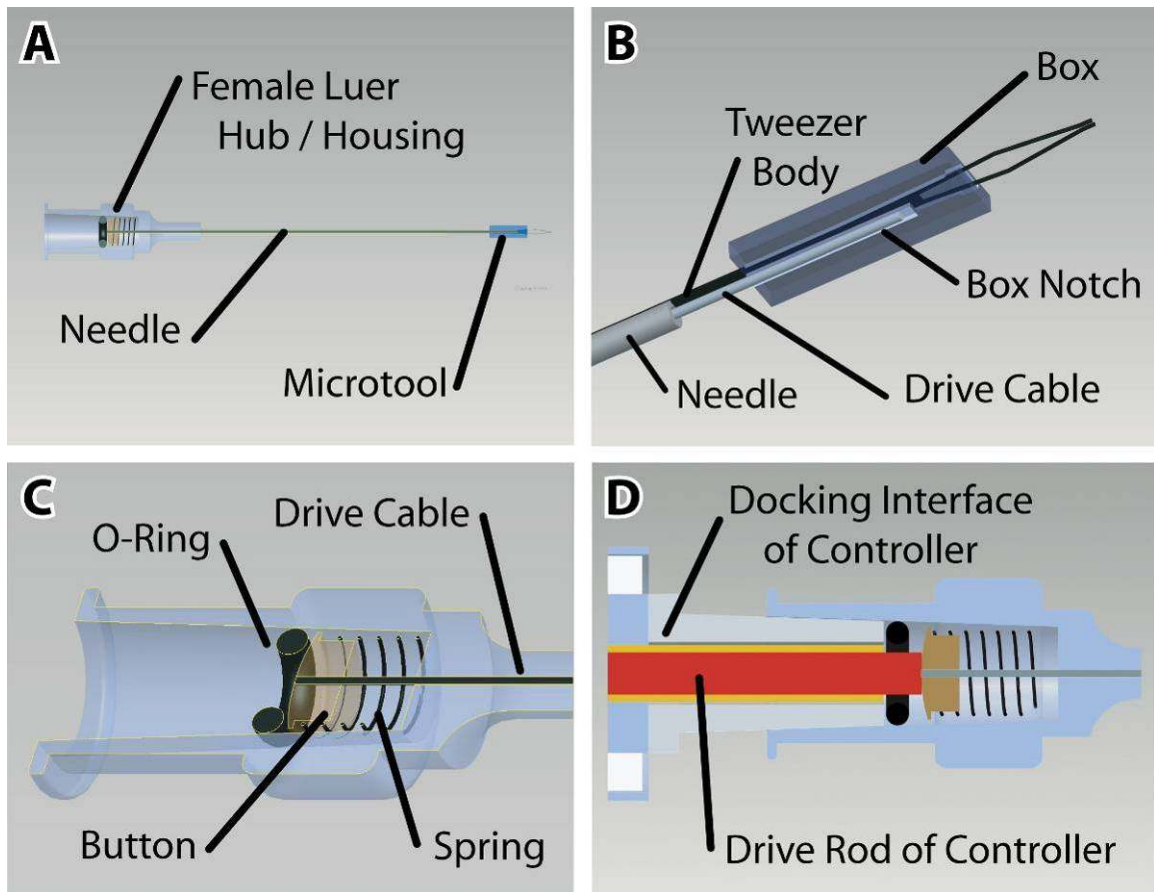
CAD drawings with labels highlighting the key features of the final luer housing package design. This package design uses a spring-loaded button to create a home position for the drive cable (A, C), which can help to control the actuation range of the MEMS device. The design does not require a physical stop near the MEMS device (B). This new package also allows for more freedom with the controller design, as the only engineering constraints required are the male luer interface and a linearly actuated drive rod to engage the spring loaded button (D).
